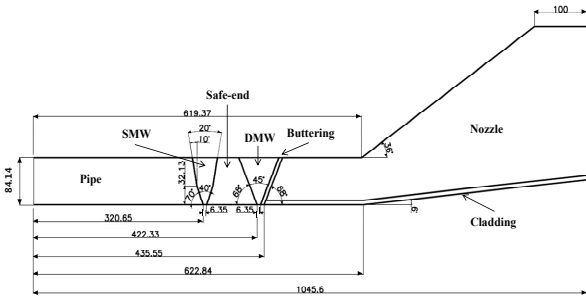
Geometries of dissimilar metal butt welds considered in the present study (Unit: mm)
